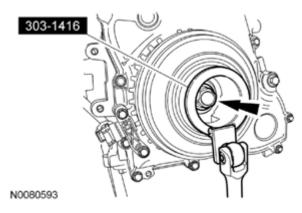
Holding Crankshaft Pulley Using Crankshaft Damper Holding Tool (303-1416) Courtesy of FORD MOTOR CO.
